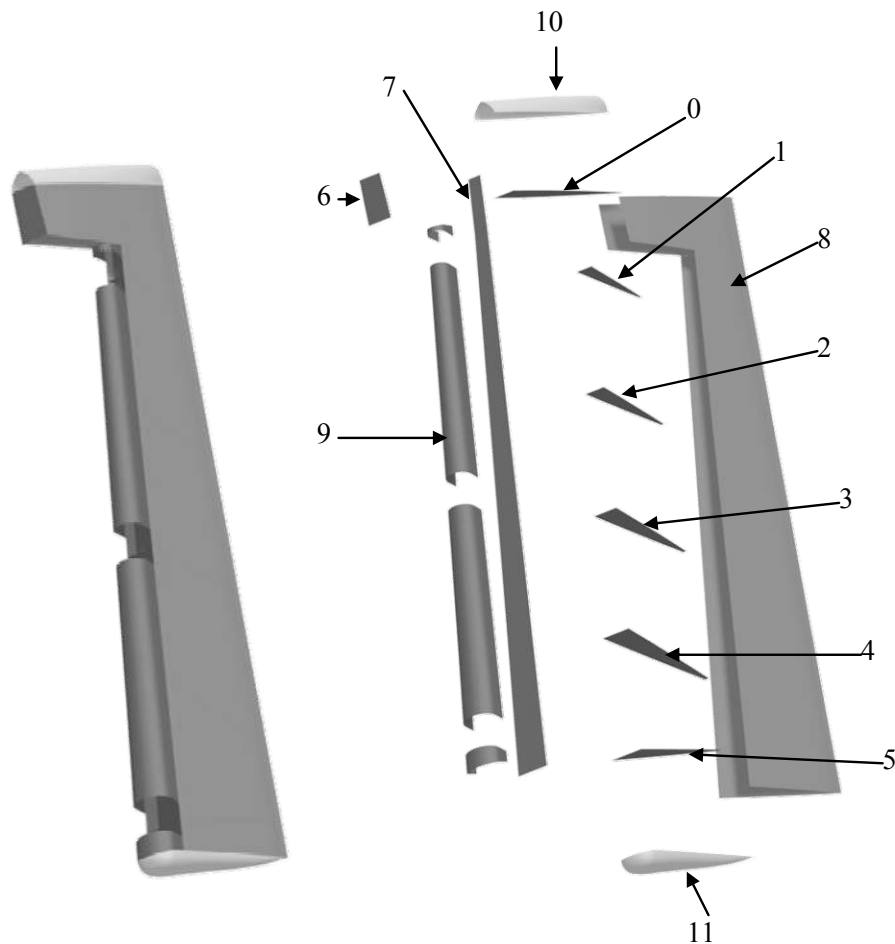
Eaglet rudder manufacturing baseline including an exploded view showing all manufacturable parts
